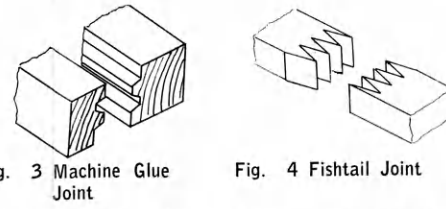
Machine Glue Joint Fig. 4 Fishtail Joint
